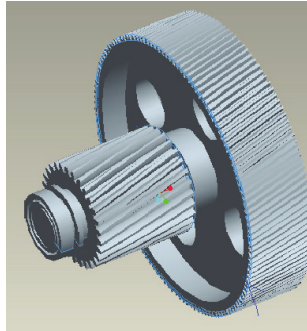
The virtual assembly of the middle shaft components of the two-stage gear reducer-elical
